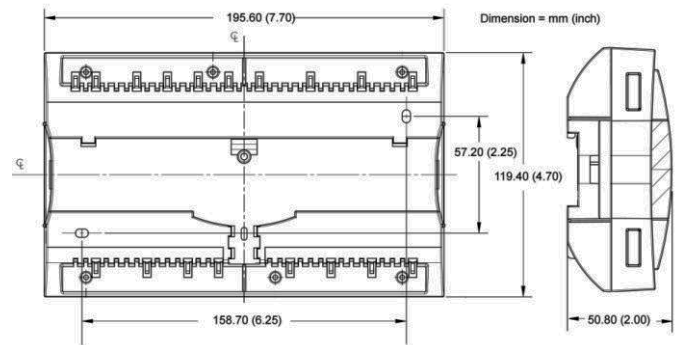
Remote-I/O – ECC-401 & 520 Series dimensions
